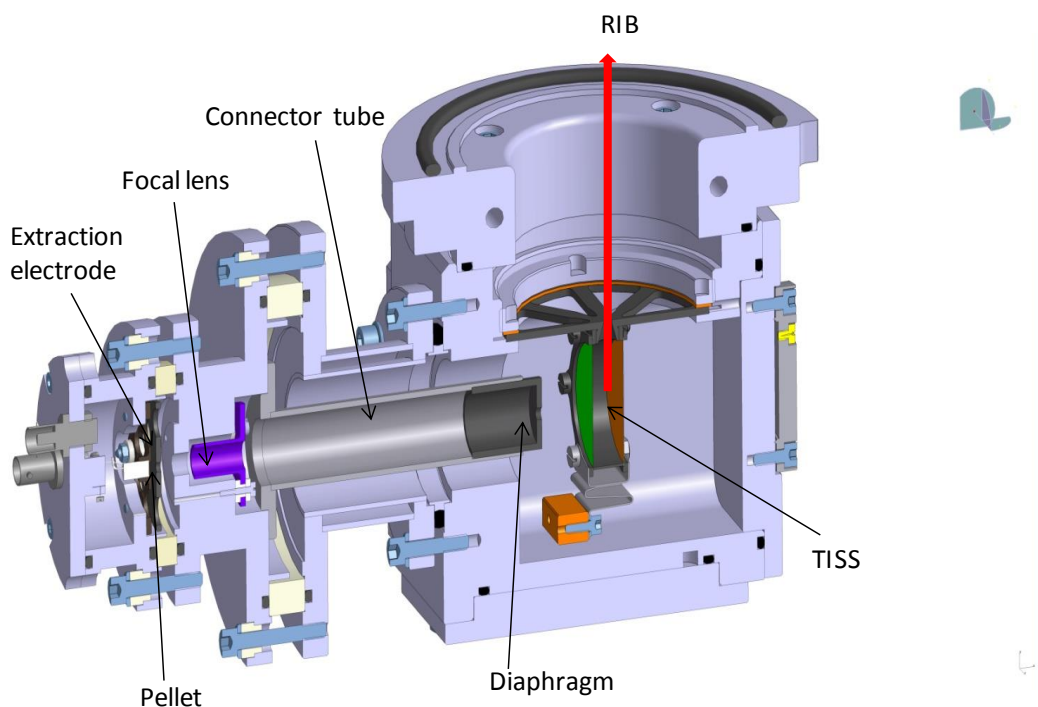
Mechanical drawing of the ion gun connected to the TISS chamber.
